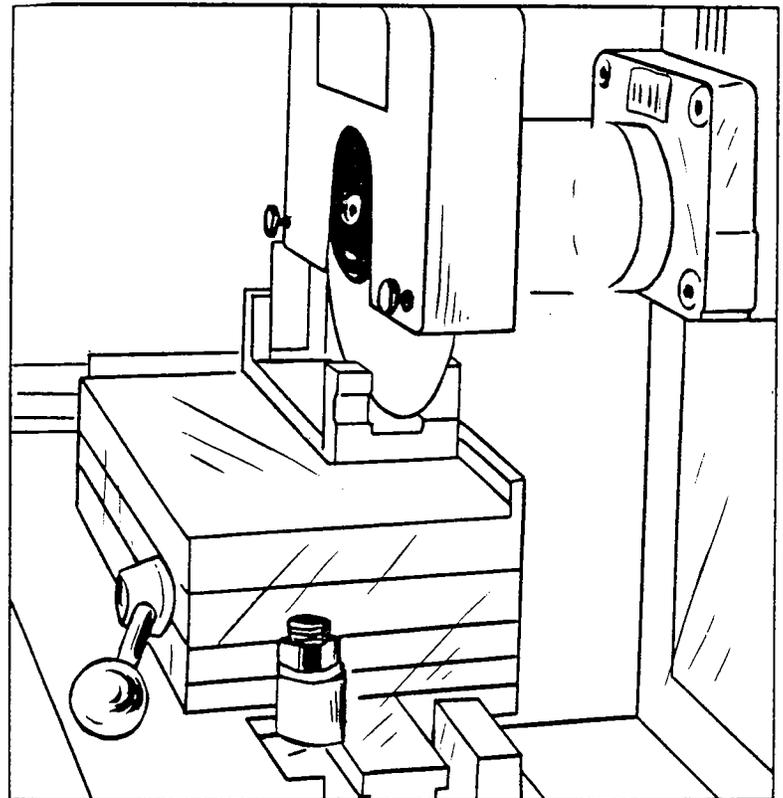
Movable wheel slide upright contributes immeasurably to accurate slot grinding
